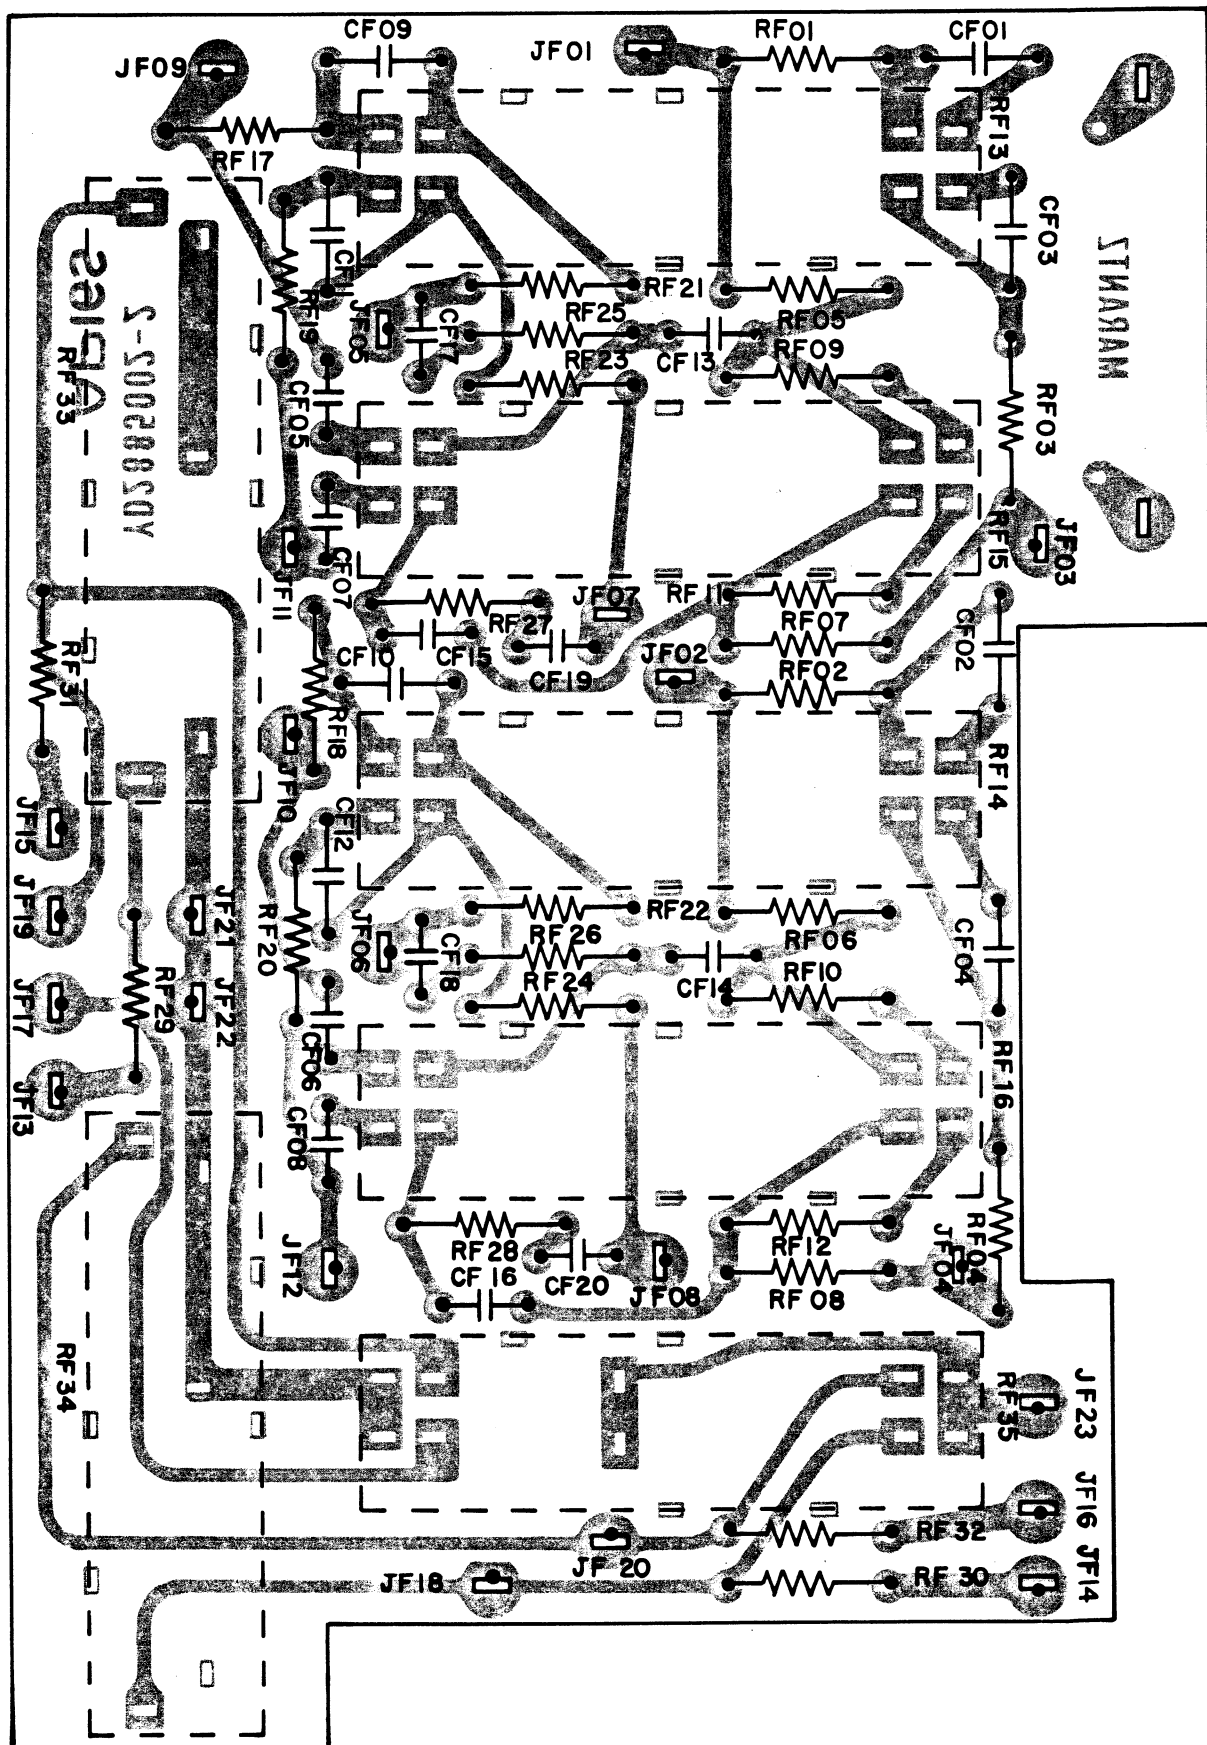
Tone and Balance Control Unit Assembly PF01 Component Locations
